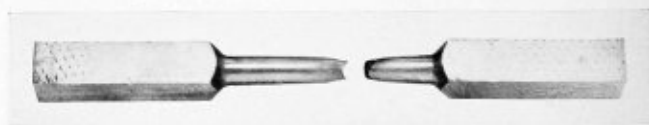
Typical tensile test specimen of shielded arc weld metal showed tensile strength of 76,100 pounds per square inch; elongation in 2 inches of 25.8 percent; reduction in area of 48 percent
